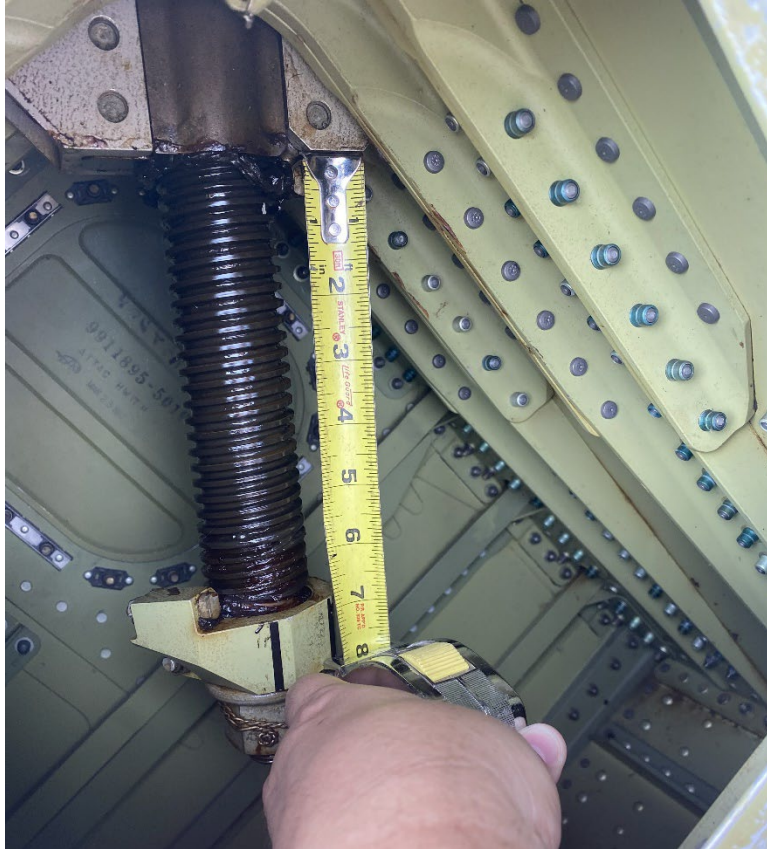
The horizontal stabilizer jackscrew actuator and "BG" measurement.
